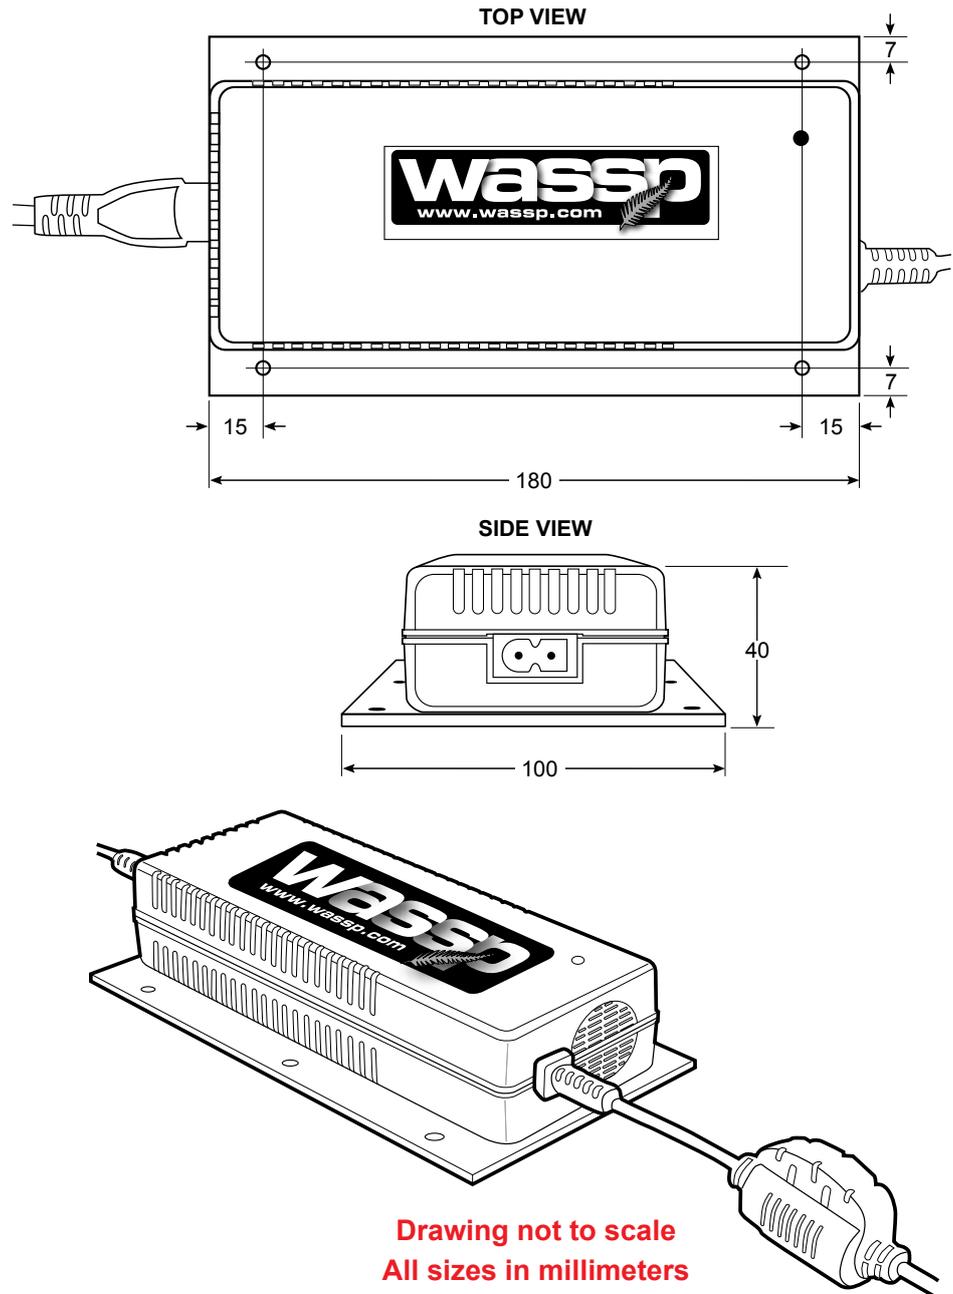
230 V AC UPS Mounting Bracket Outline and Dimensions
